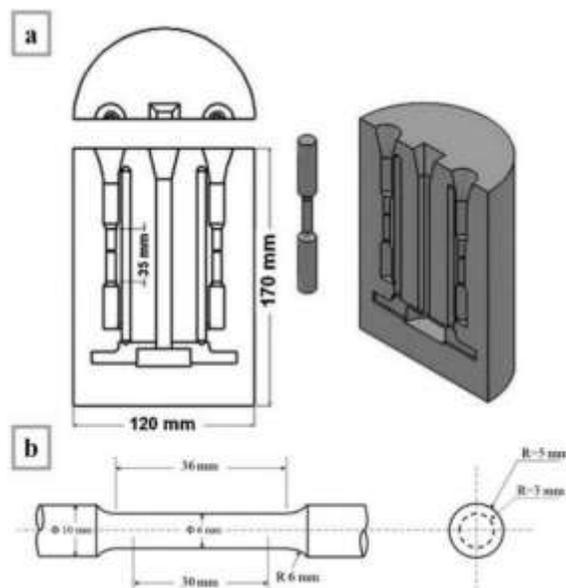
Schematic drawing of (a) casting mould and (b) tensile test specimen.
